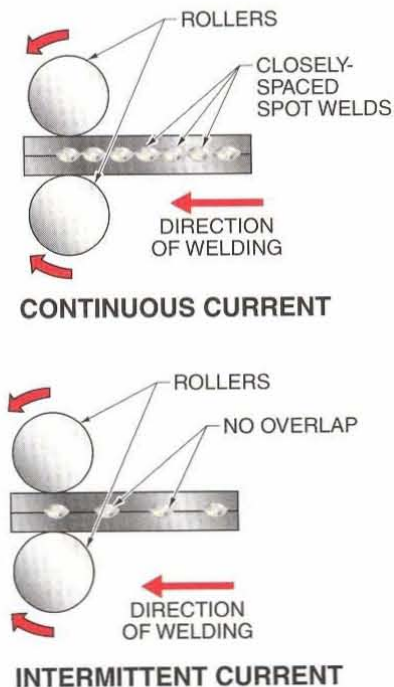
Seam welding is an advantageous welding method because of its short current cycle. The rollers may be cooled to prevent overheating.
